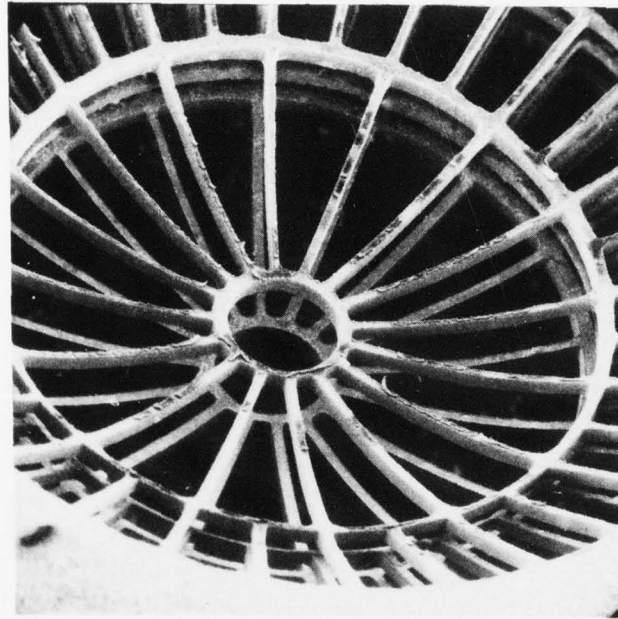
TILTED VIEW OF SANDWICH GRID
